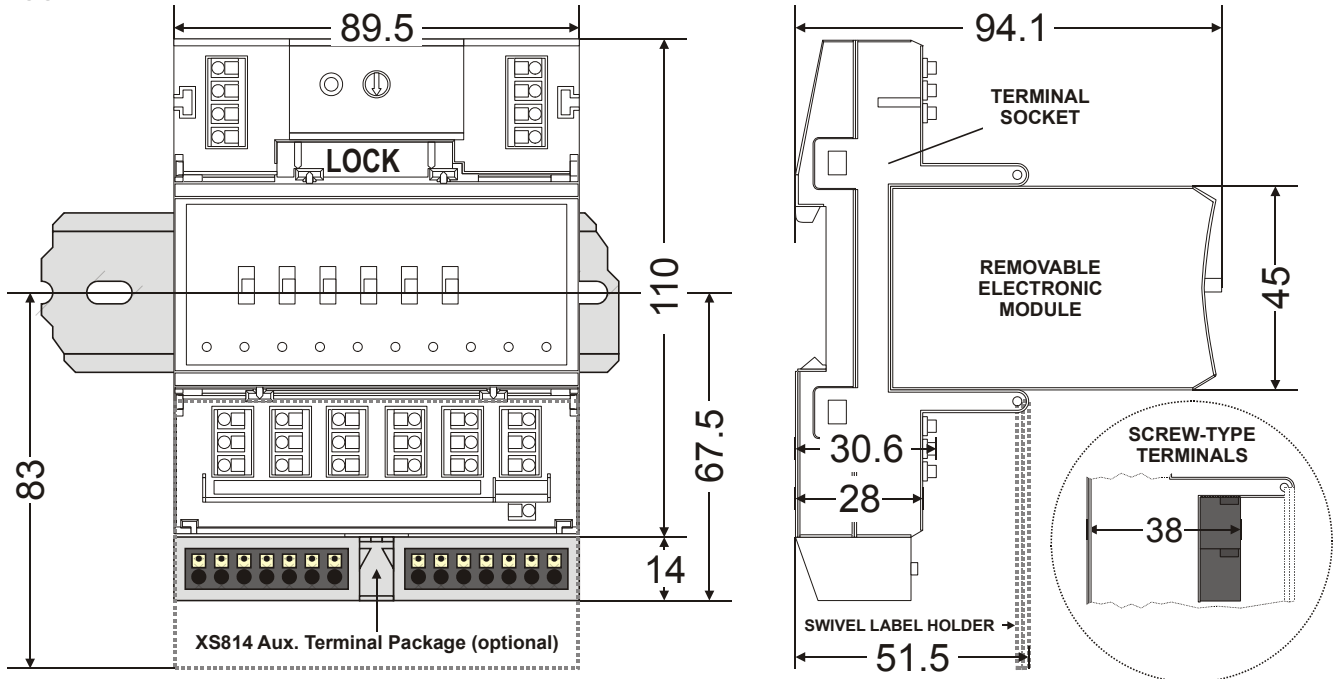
Pluggable Panel Bus I/O Modules (with Manual Overrides), incl. Terminal Socket, dimensions (in mm)
